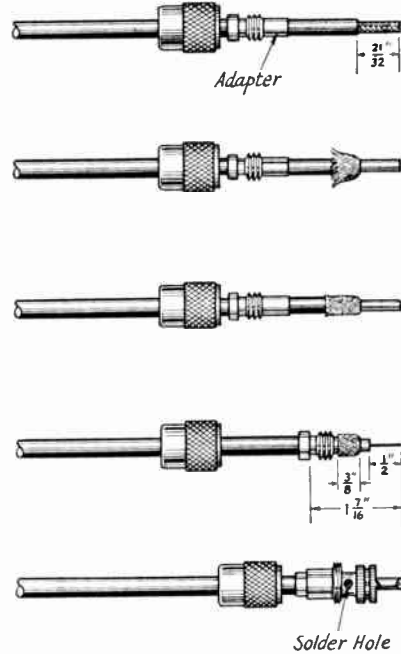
Method of assembling 1/4-inch cable, Amphenol Type 83-1SP (PI-259) plug and adapter.
